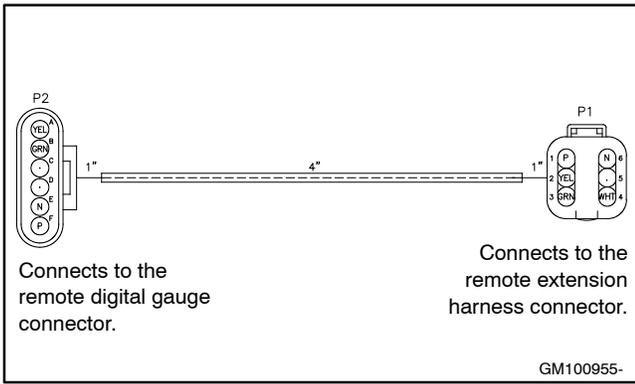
Remote Gauge Harness GM32325 (Included with Kit GM32337-KP1)
